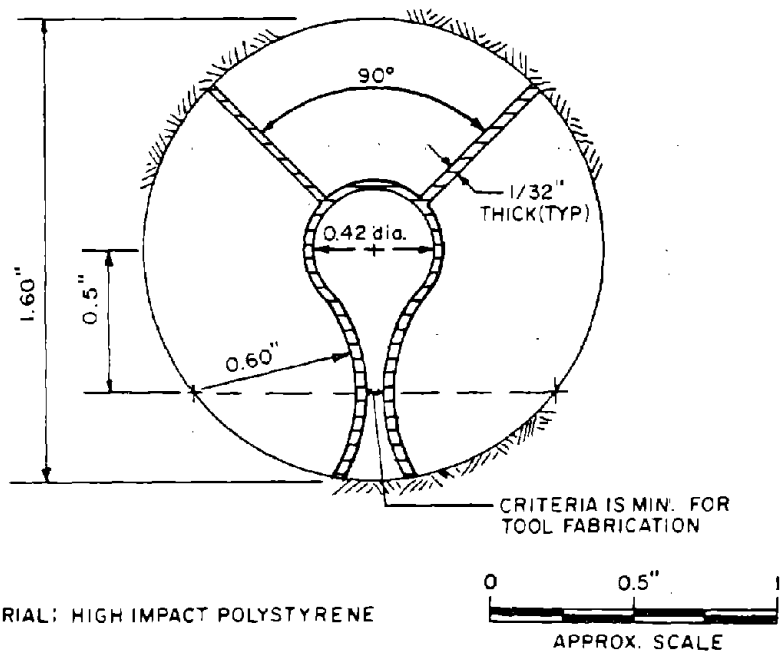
NOTCHING TOOL ENTERING DRILL HOLE
